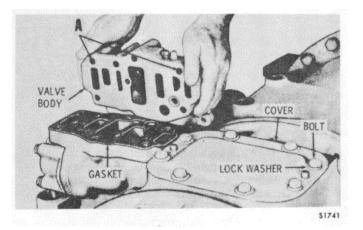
Installing Main-Pressure Regulator Valve Body Assembly
